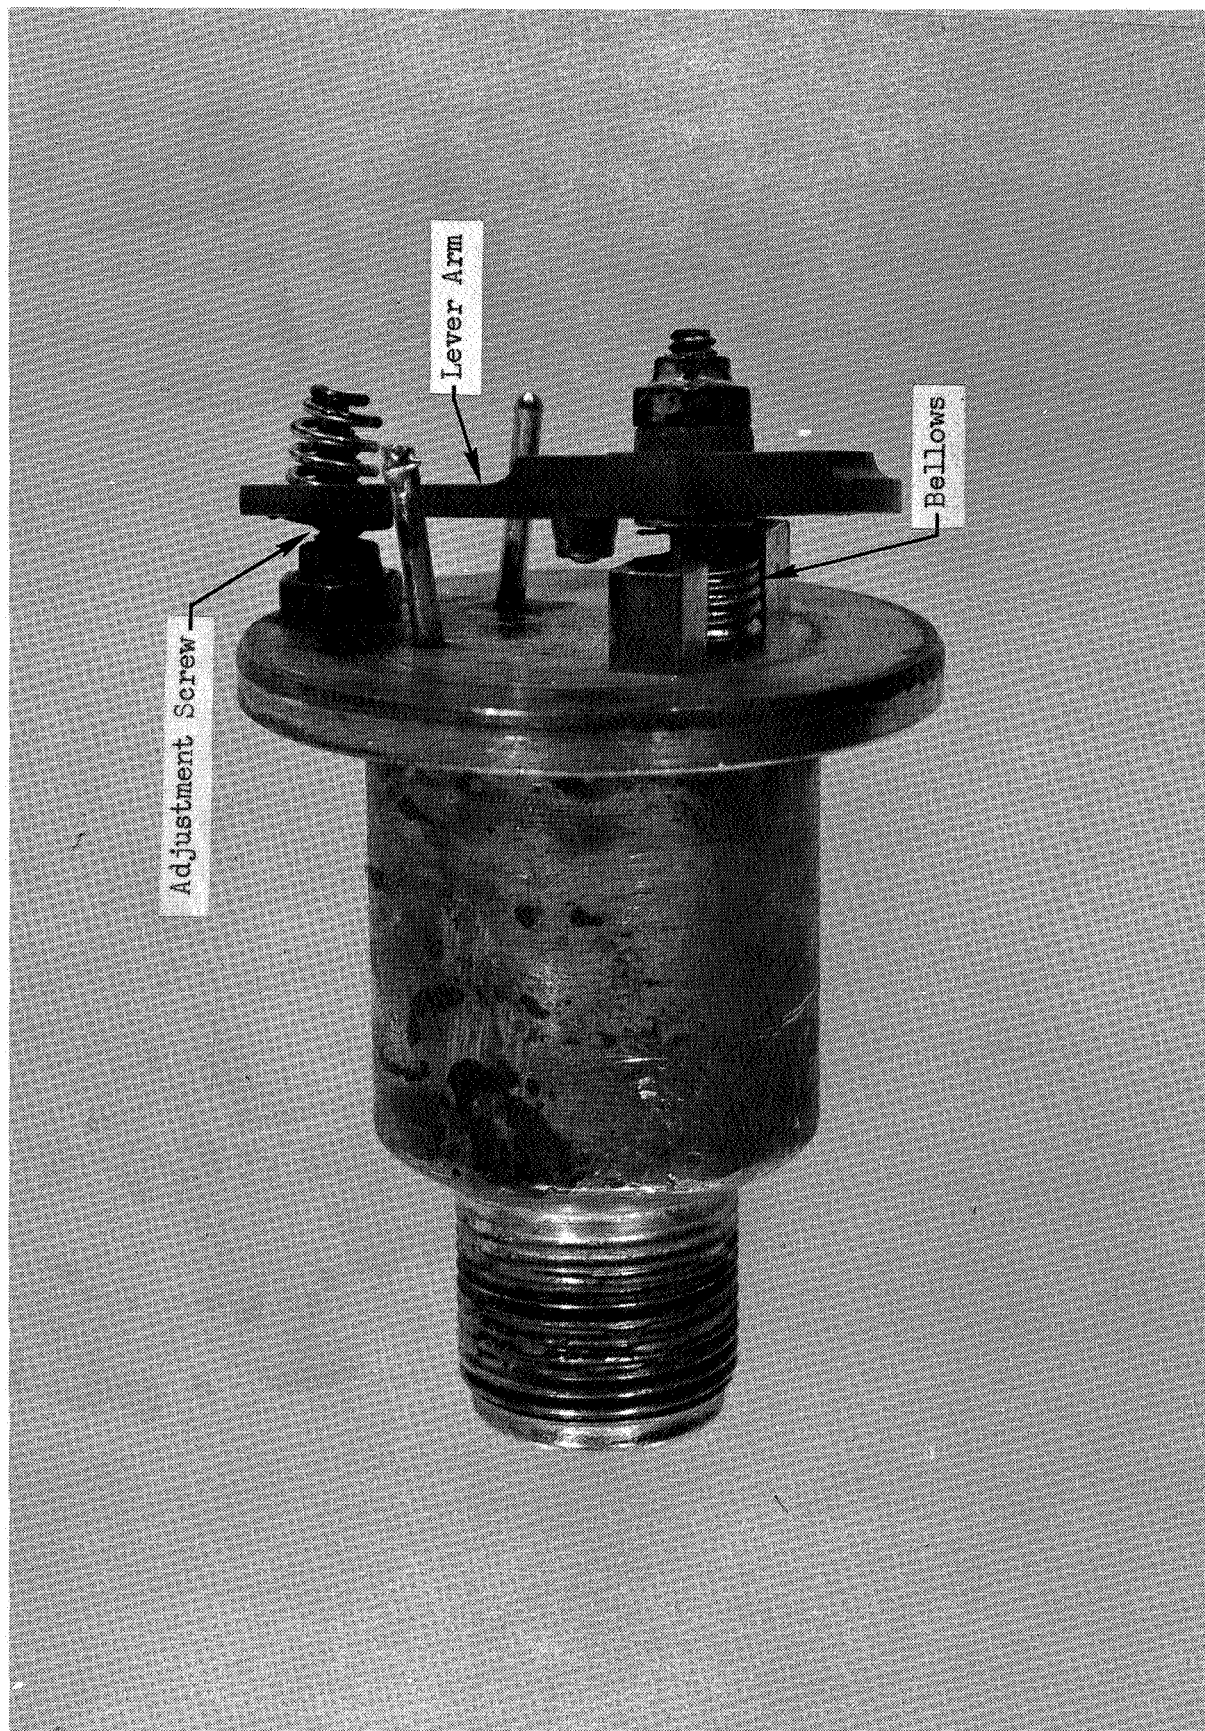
Broken Bellows Assembly (Specimen 1)
